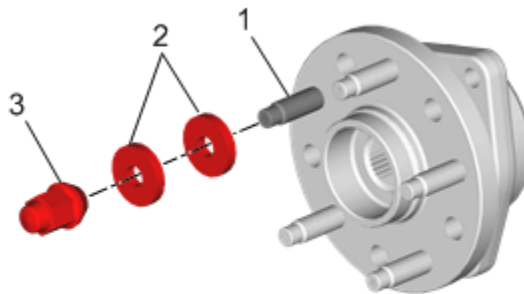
Wheel Stud, Flat Washers And Wheel Nut
